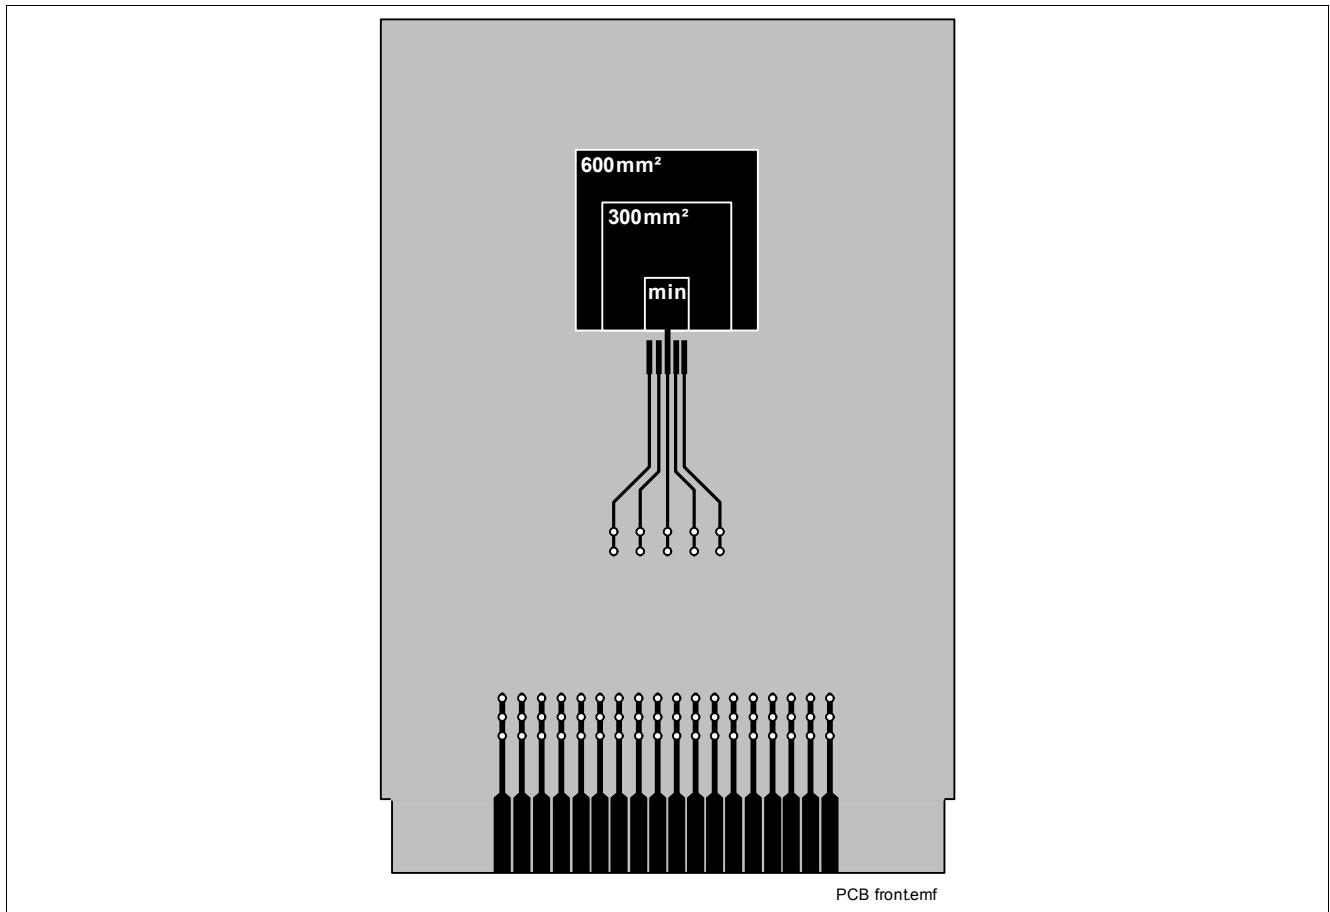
Front view of PCB layout used for Z_{thJA} simulation
